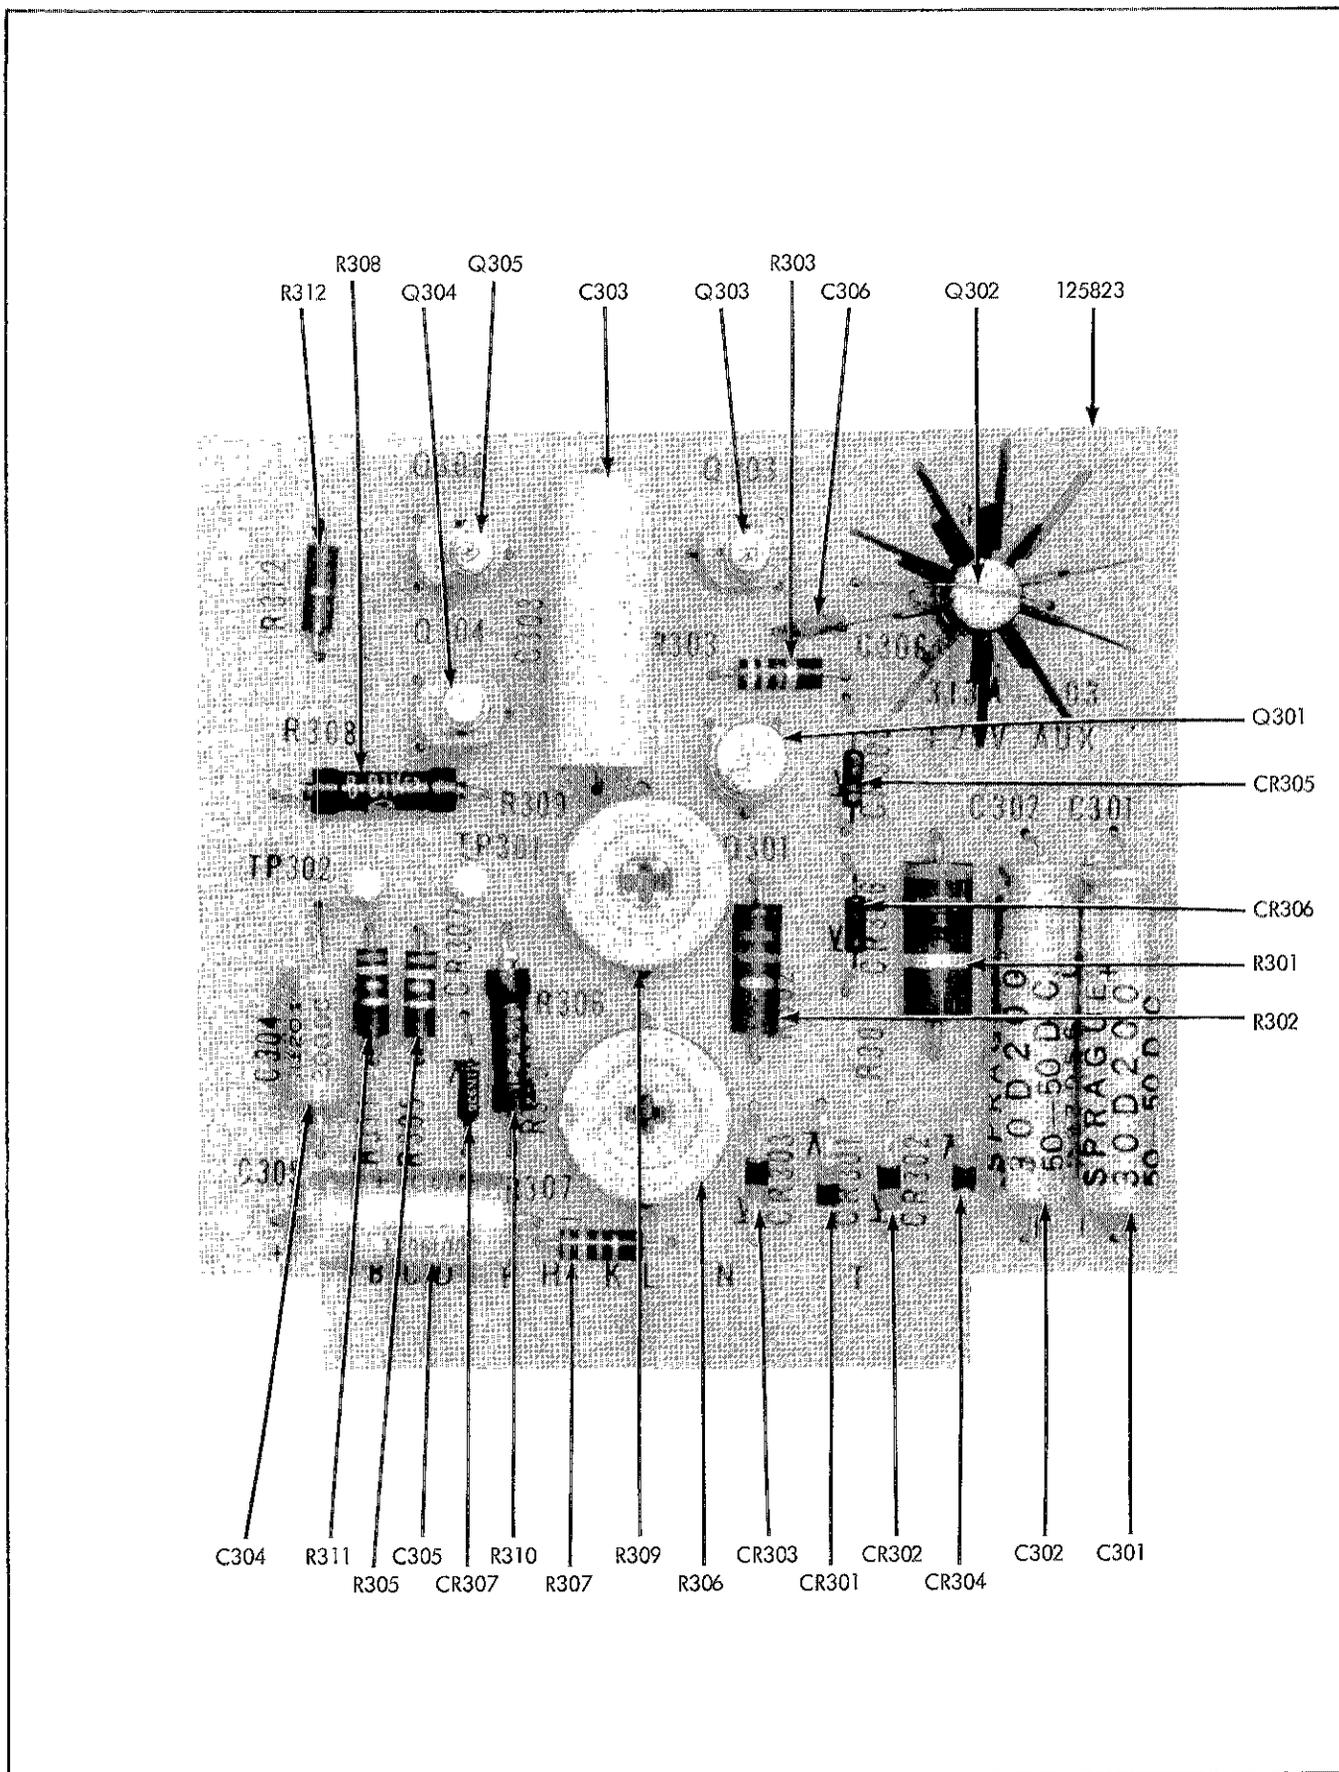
AUXILIARY POWER SUPPLY ASSEMBLY, +25V
